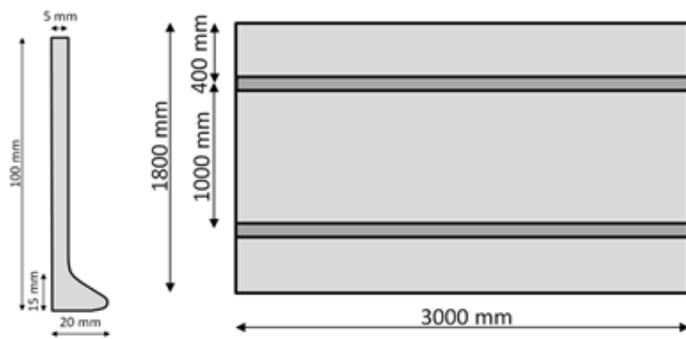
Dimensions of the flat section and the arrangement of the first-order bracings
